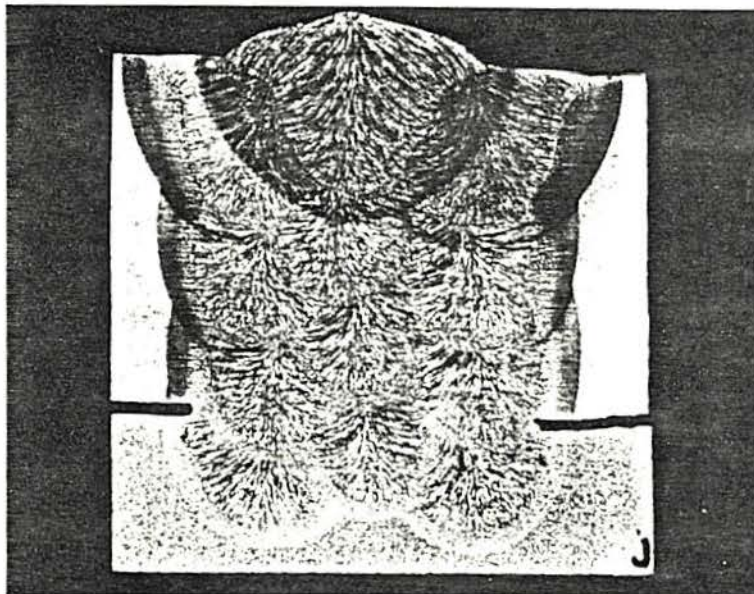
WELD METAL THERMAL ANALYSIS - WELDMENT: WQ674L4
